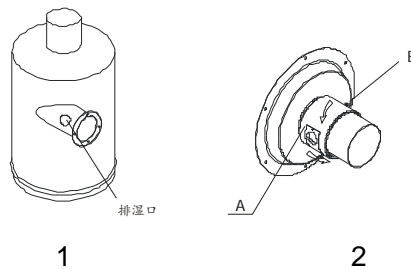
HAR/AIF/ADC Outline Drawing
